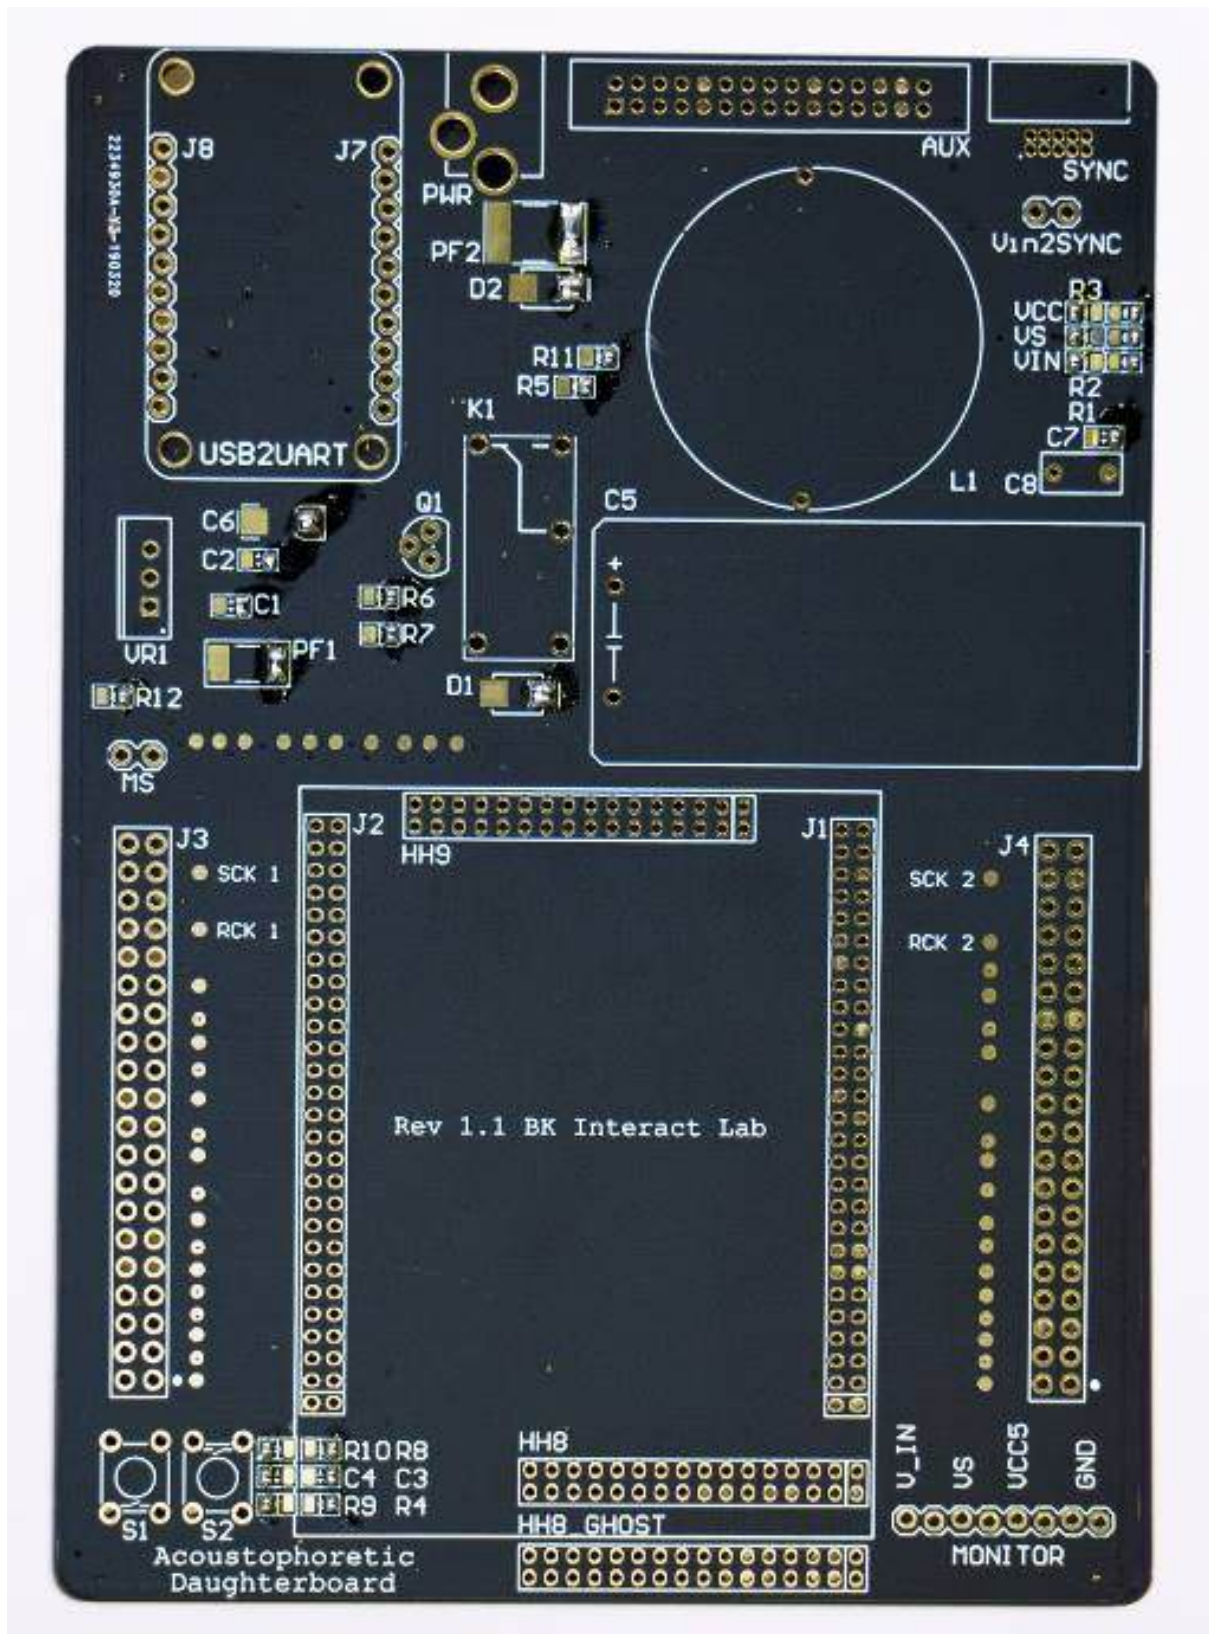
Tacked Controller board. See how each SMD footprint has one pad populated with solder.
